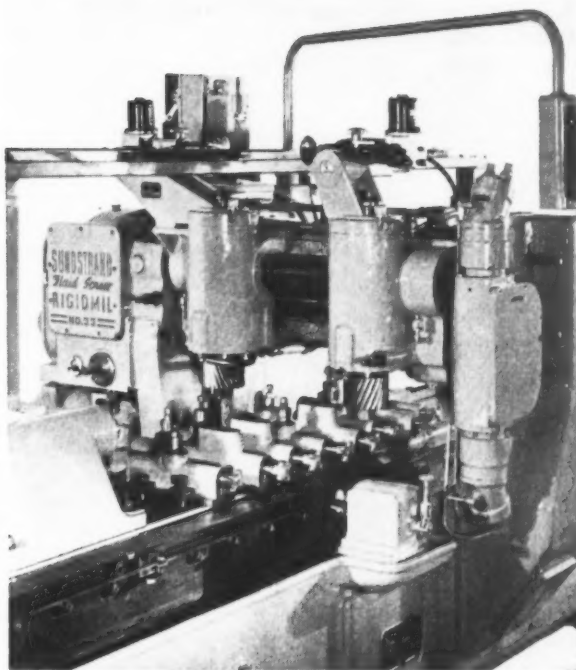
Close-up View of Sundstrand Propeller-edge Milling Machine Shown in Fig. 2
